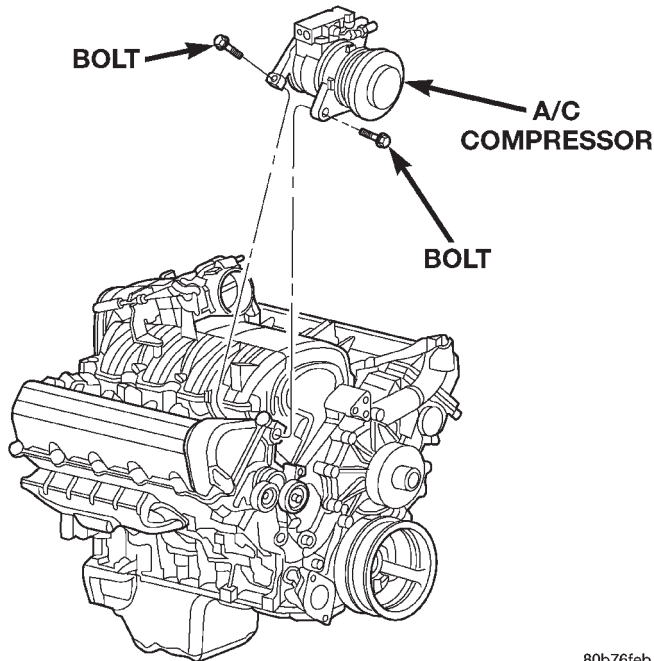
Compressor Remove/Install - V8 Engine - Right View
